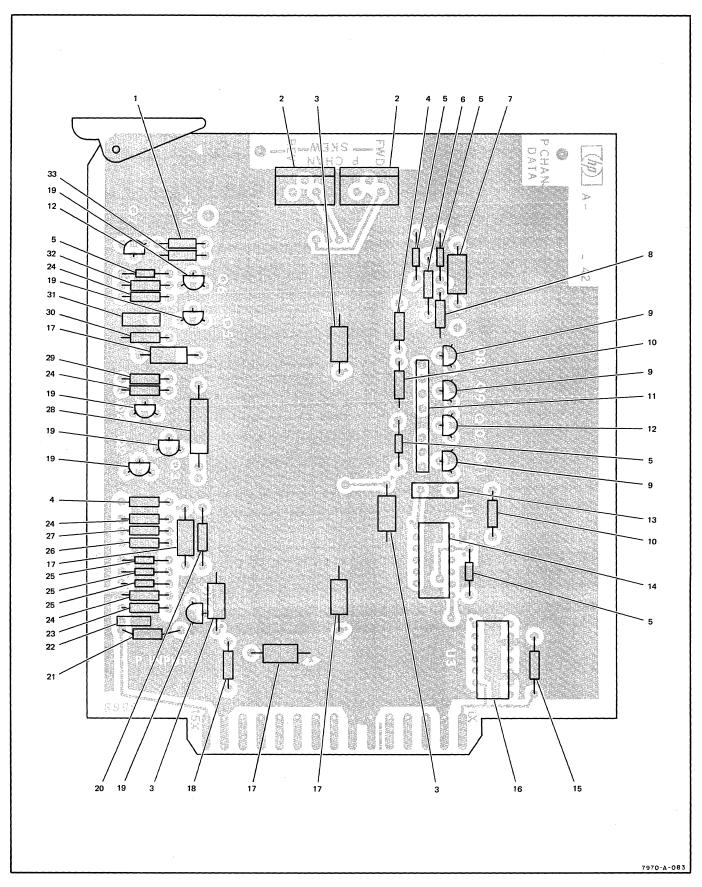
Single-Channel Read Data PC Assembly A18A2
